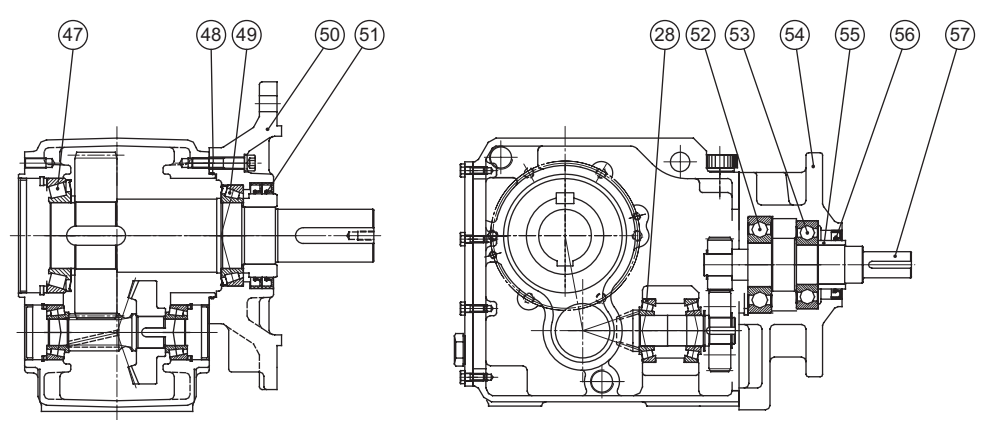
Flange Mount Type Reducer (Example: KHF-72L-F1)
